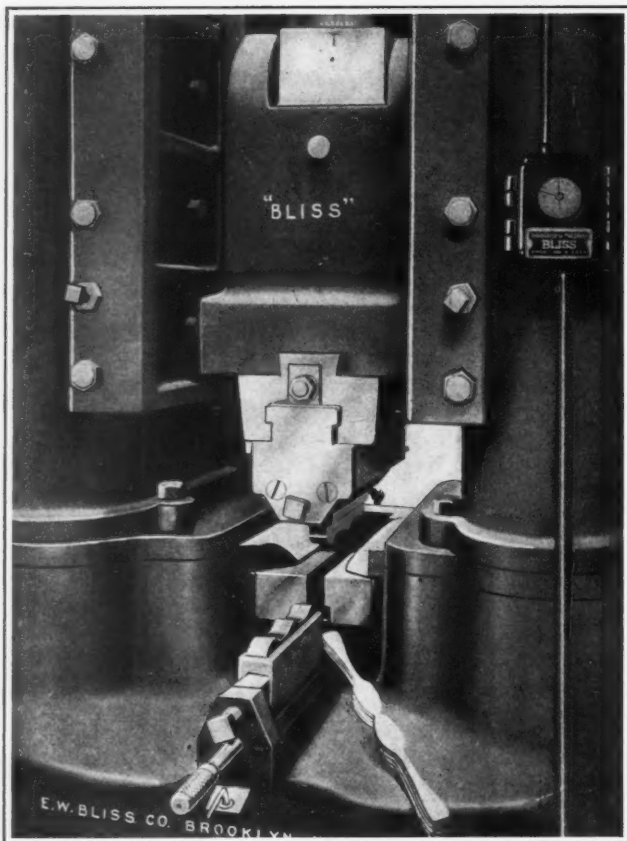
Close View of Profiling Tools with Die-holder drawn Forward
